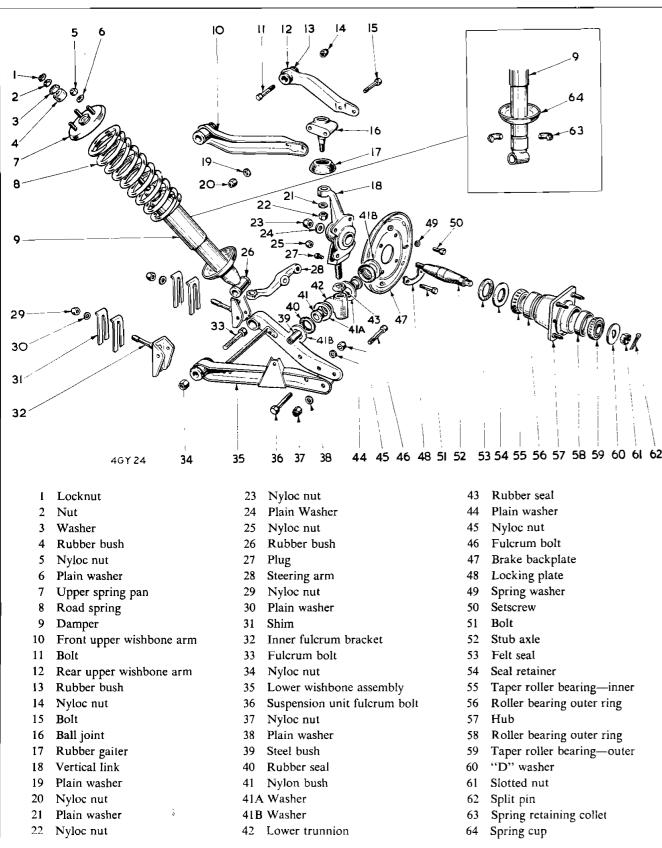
Exploded front suspension. Inset Woodhead-Monroe type
